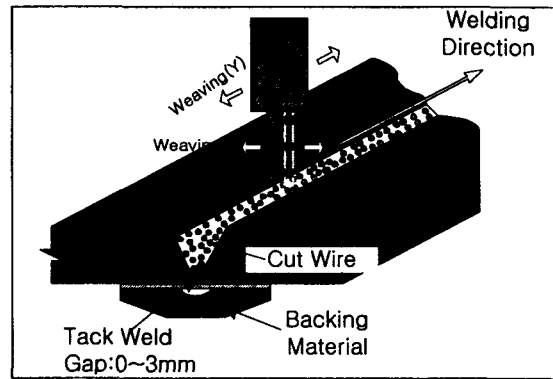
Schematic of one side welding with high speed weaving torch
